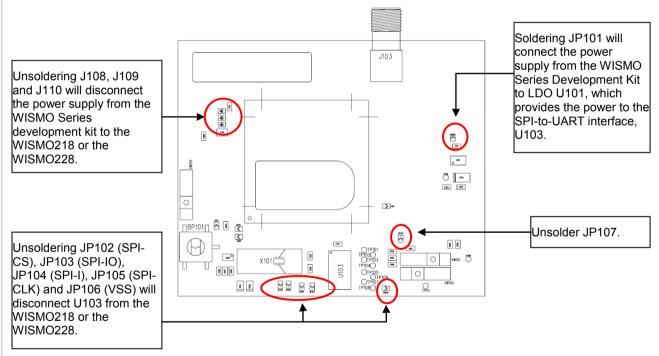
WISMO Series Socket-Up Board Settings for an Internal SPI Application
